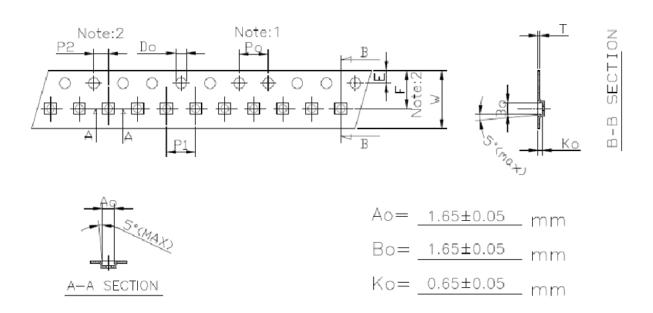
Tape and Pocket Drawing for LGA-4 Package
